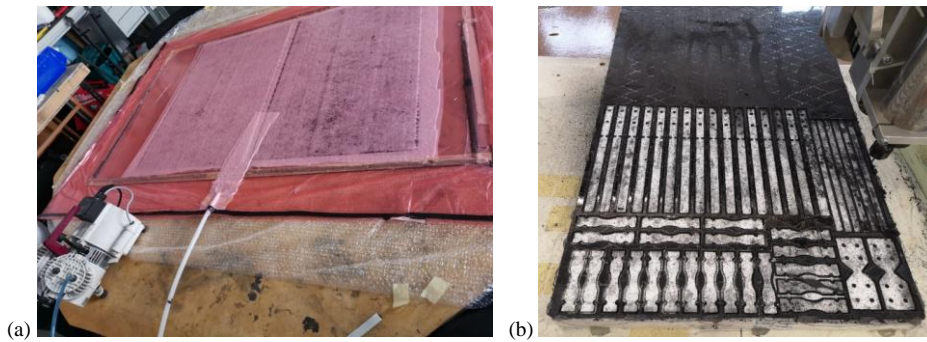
(a) vacuum bag moulding process, (b) milling of specimens.
